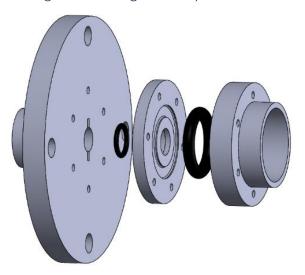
Rear flange and sealing assembly - left - prismatic slot, mid - sealing plate with O-rings, right - pipe flange
